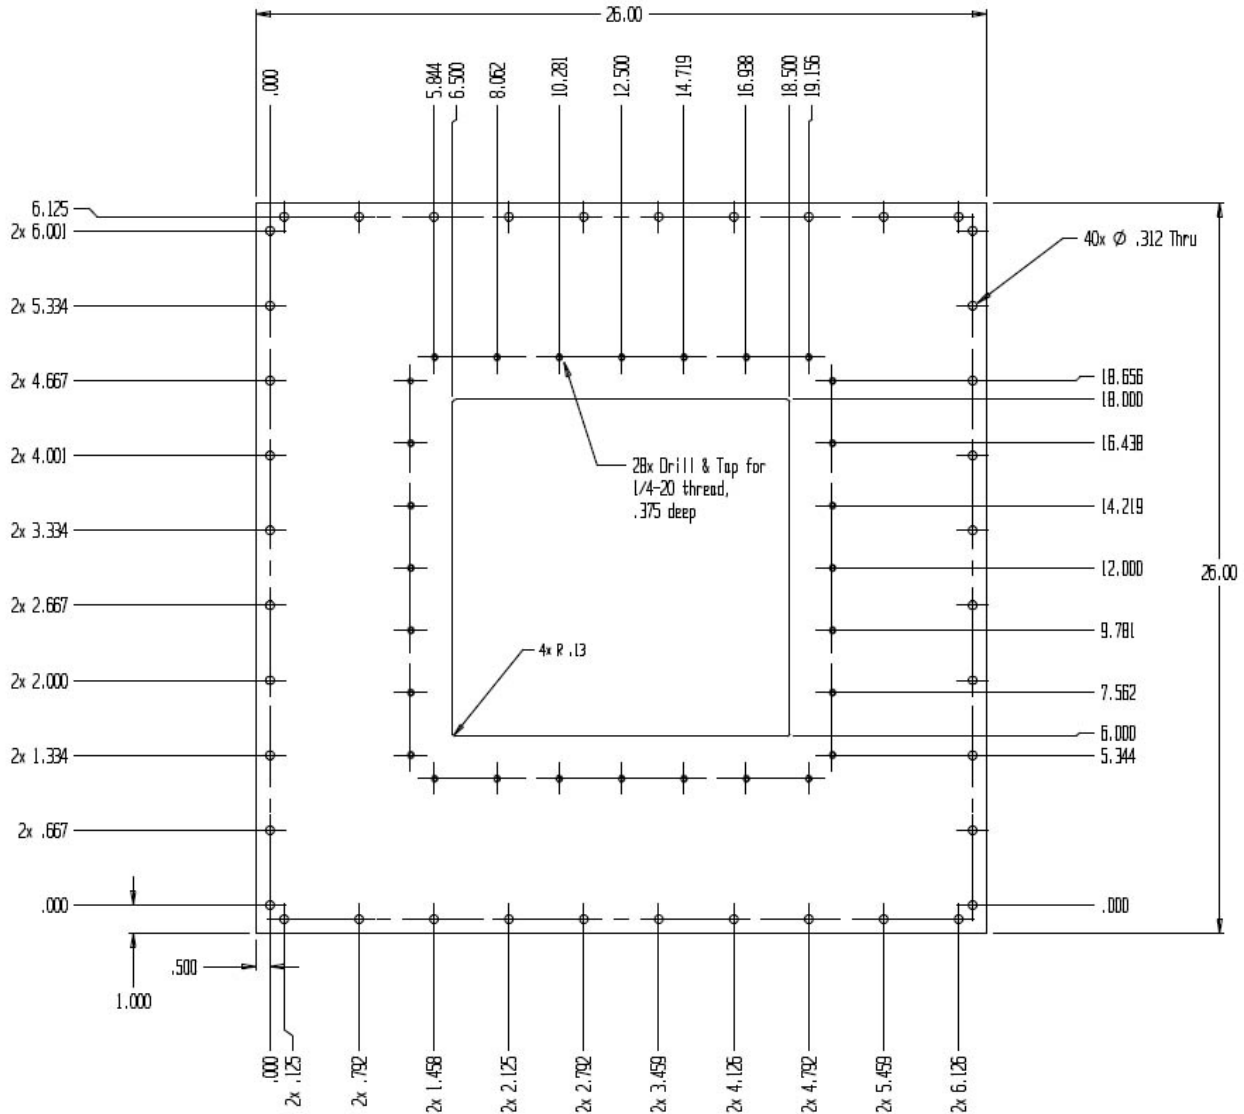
Main Adapter Plate for Mounting Test Plate Sets to Wall of Shielded Enclosure
